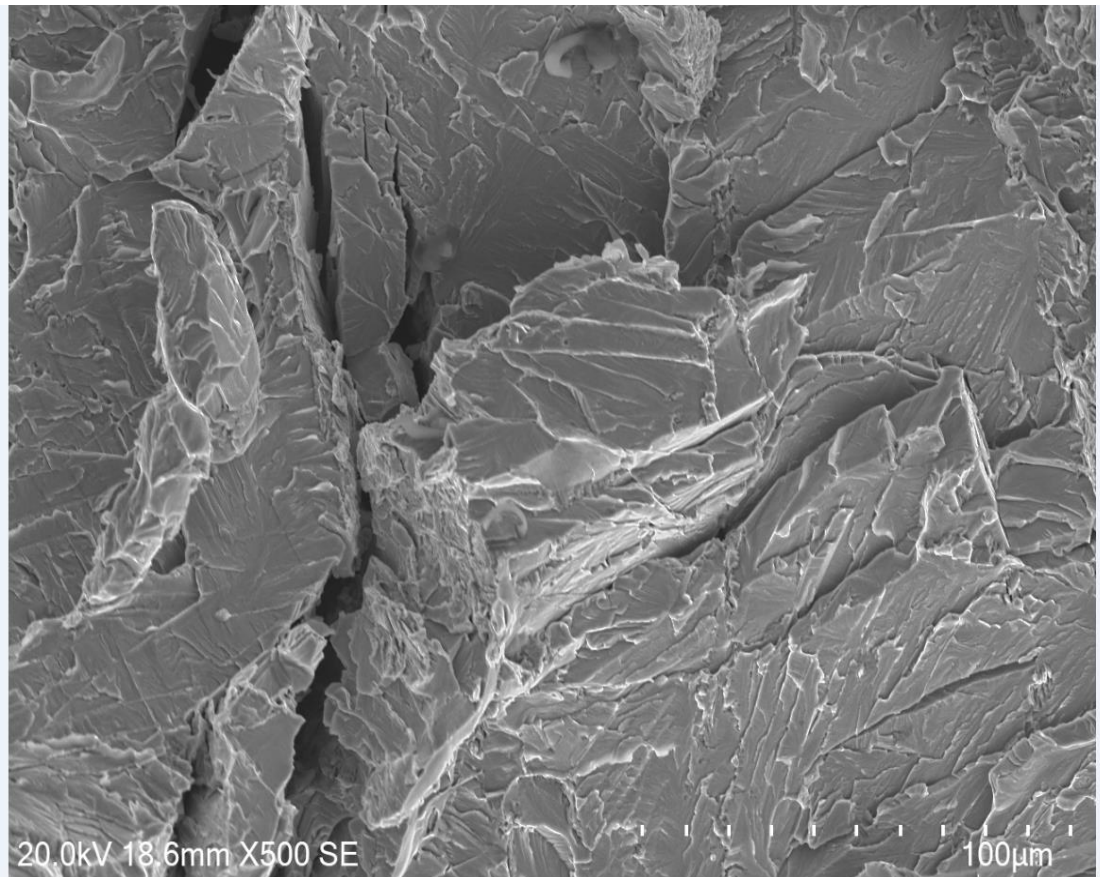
SEM fracture surface of 10005 steel specimen.
